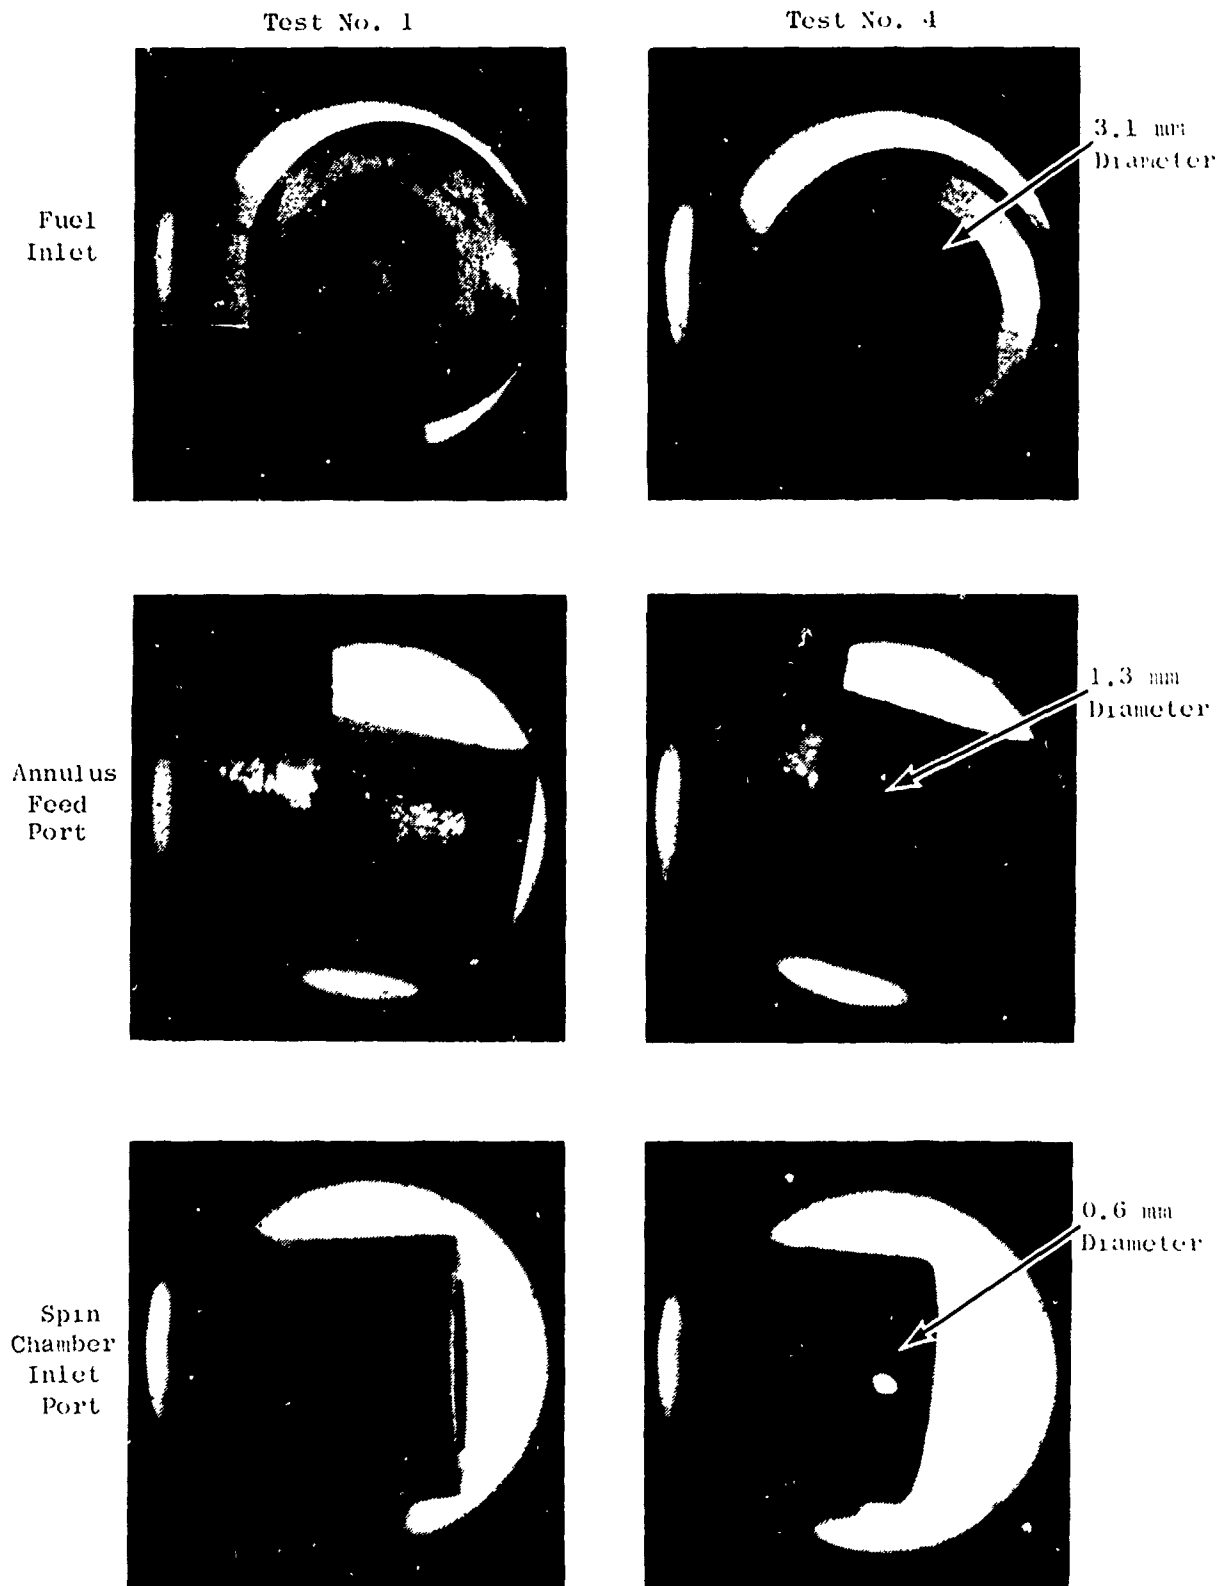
Posttest Appearance of Fuel Nozzle Primary Slot Pieces, Fuel Nozzle Fouling Tests.
